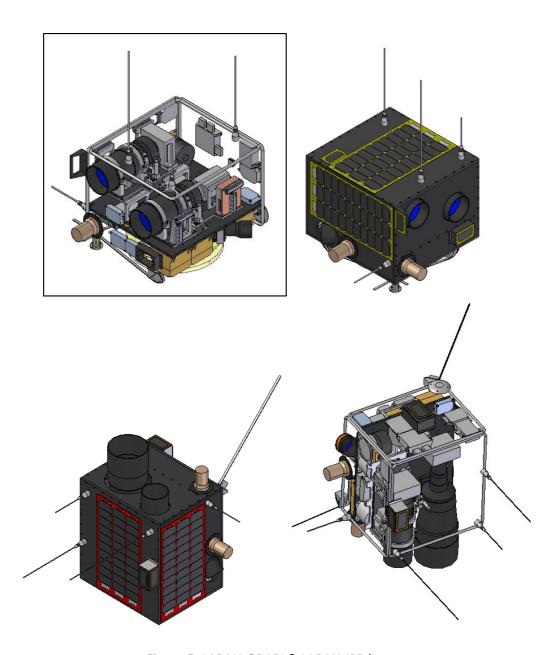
LAPAN-ORARI & LAPAN-IPB layout
